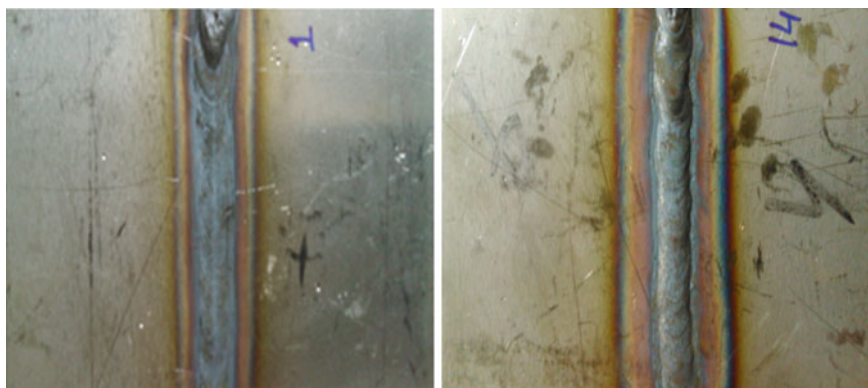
Photographic view of welded sample number 1 and 14
